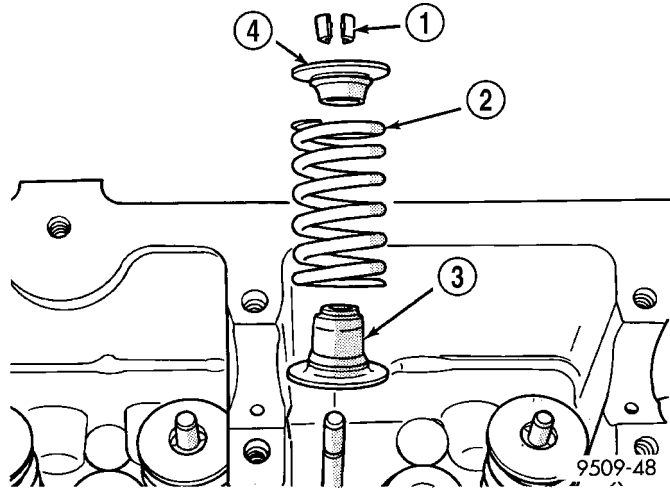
Valve Stem Seal/Valve Spring Seat - Typical
